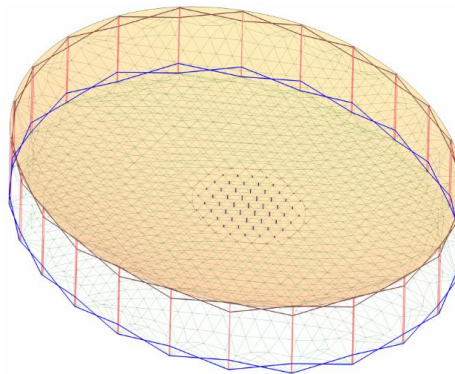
CAD reference design of a reflector dish based on the cylindrical shifted double pantograph ring and HSN-1
